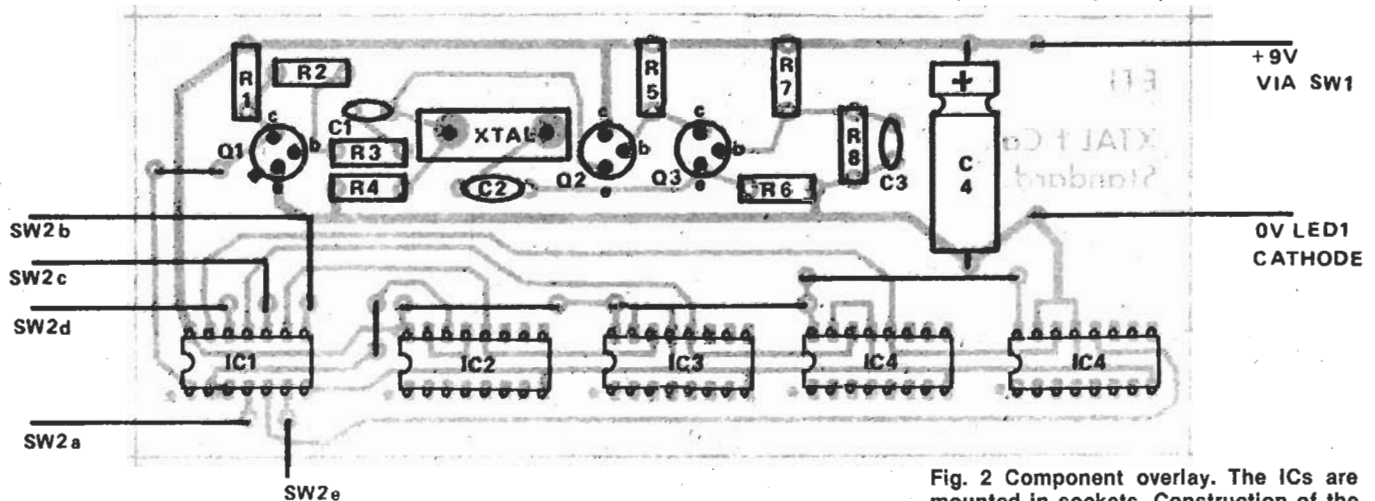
Component overlay. The ICs are mounted in sockets. Construction of the board is fairly straightforward.
